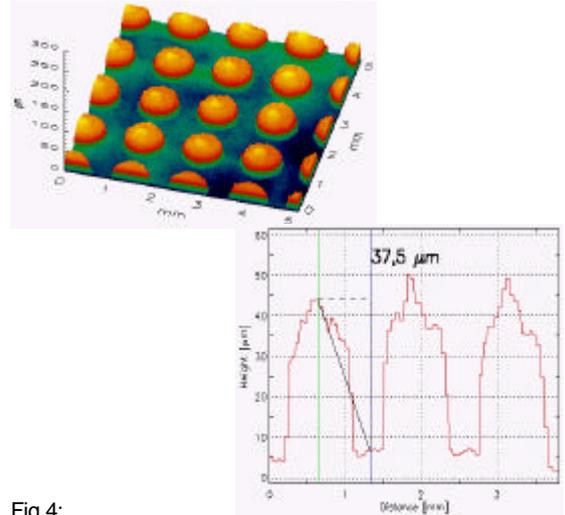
Detail measurement on solder bumps and profile for a precise z-measurement
